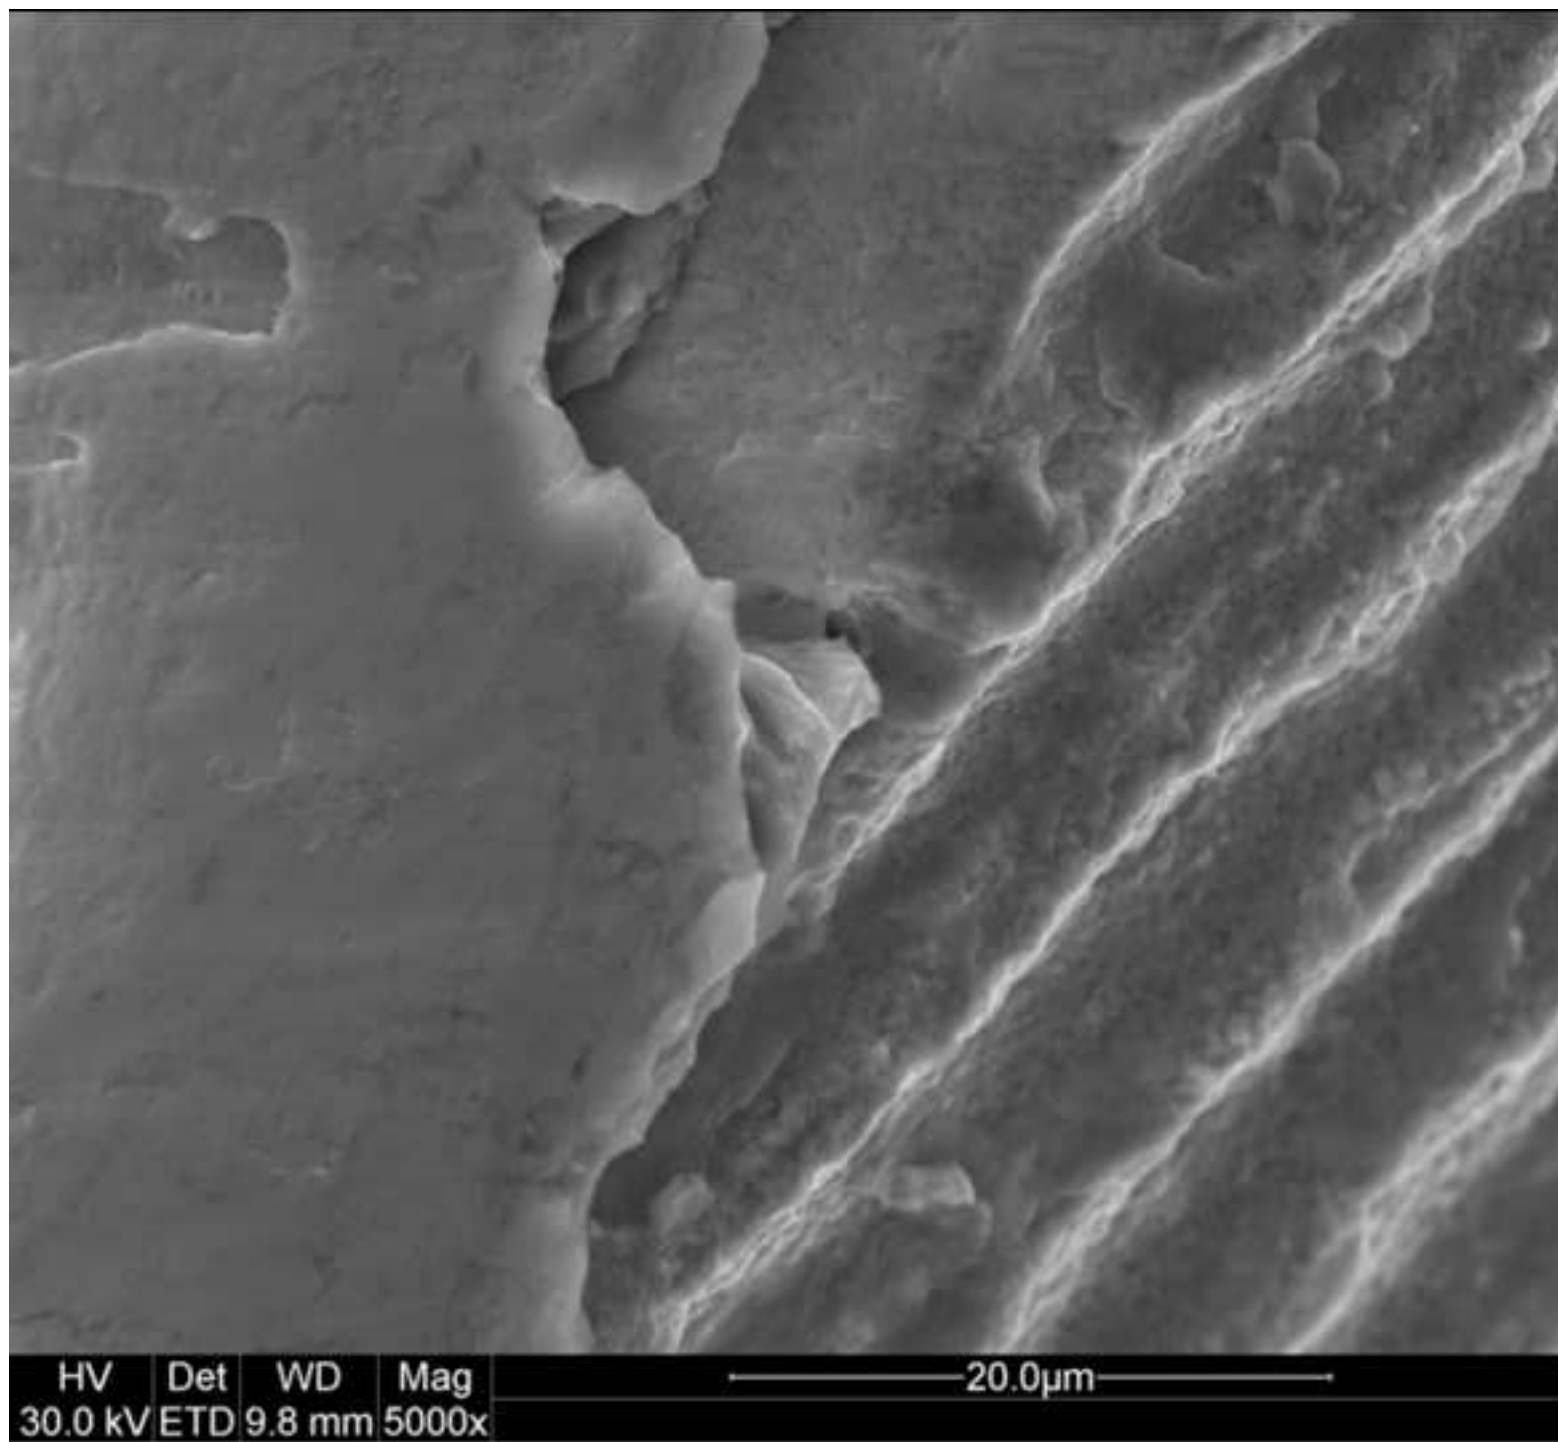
(c). AlCrN coated tool margin after 31.5 m cut length.
